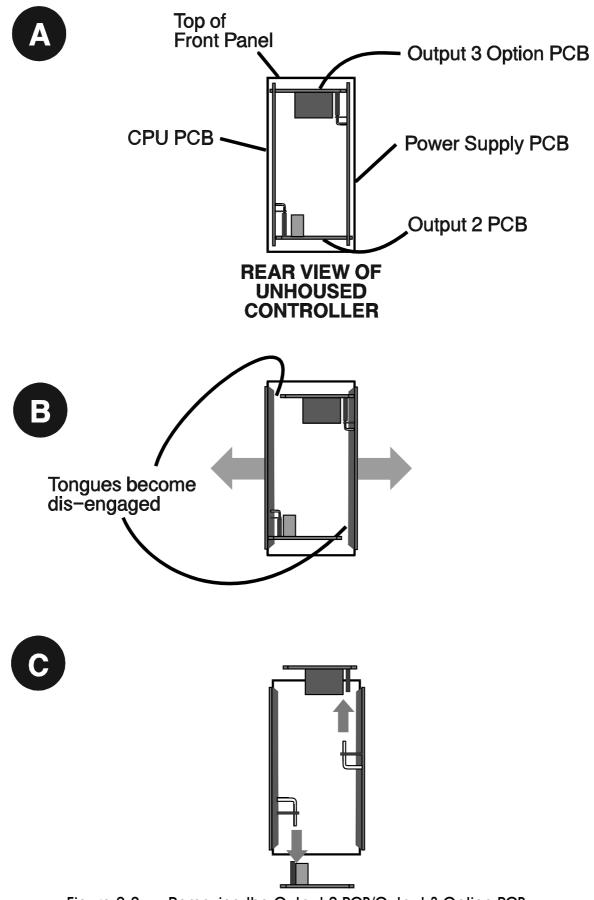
Removing the Output 2 PCB/Output 3 Option PCB
